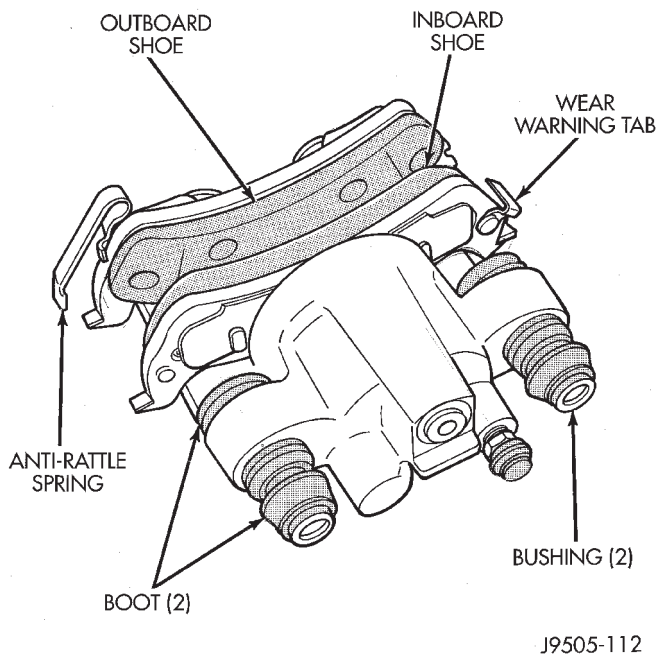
Shoe/Bushing/Boot Position In Caliper
